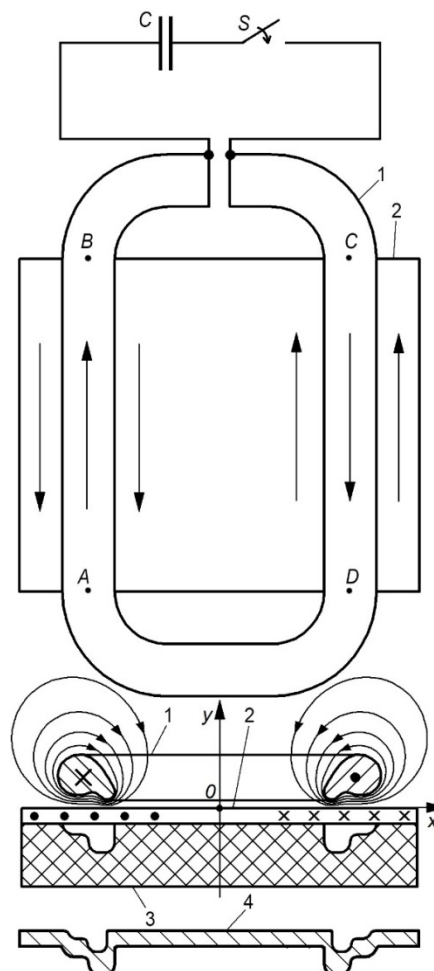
A Device for electromagnetic forming of flat workpieces.
